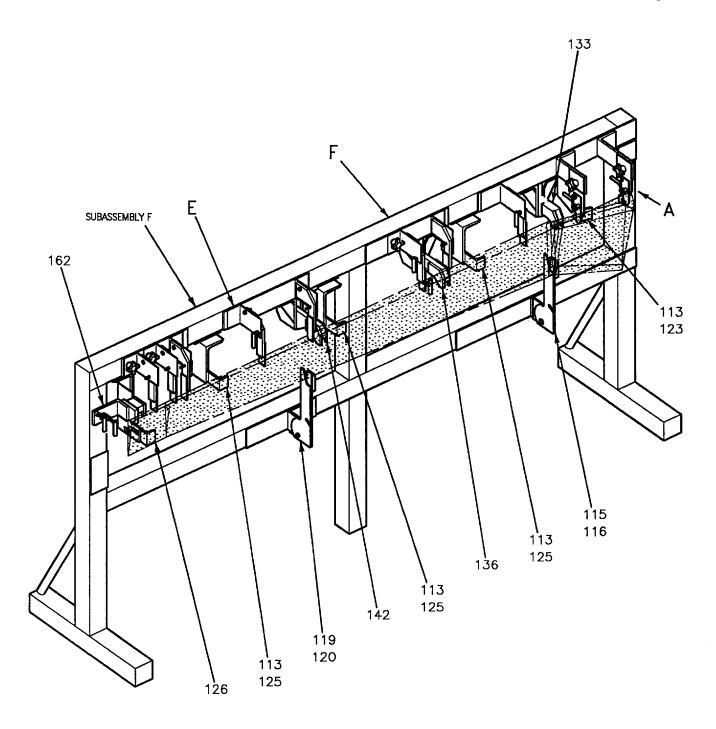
Inboard Drive Arm, 74A180728 (Sheet 4)
